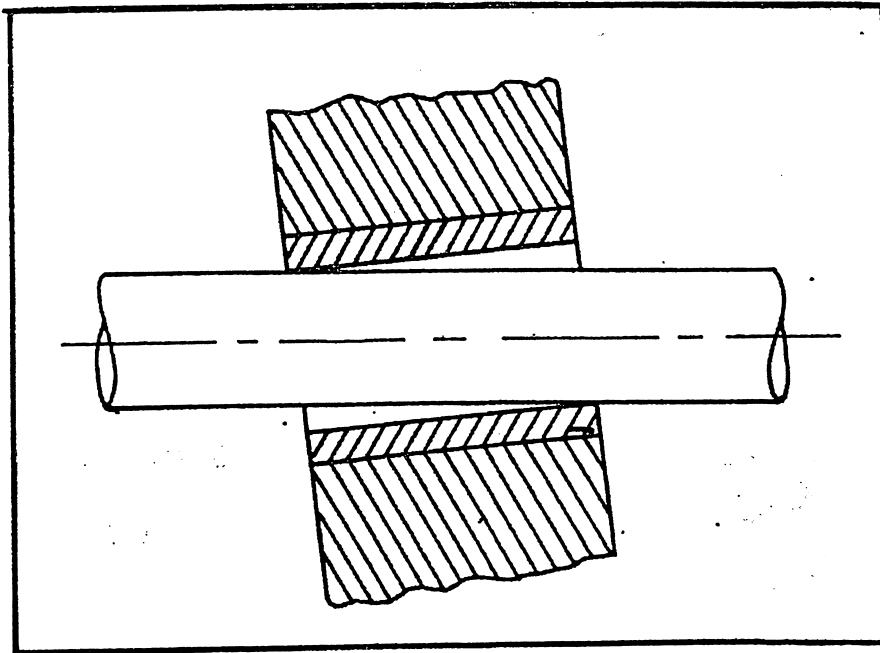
MISALIGNMENT OF JOURNAL BEARING
